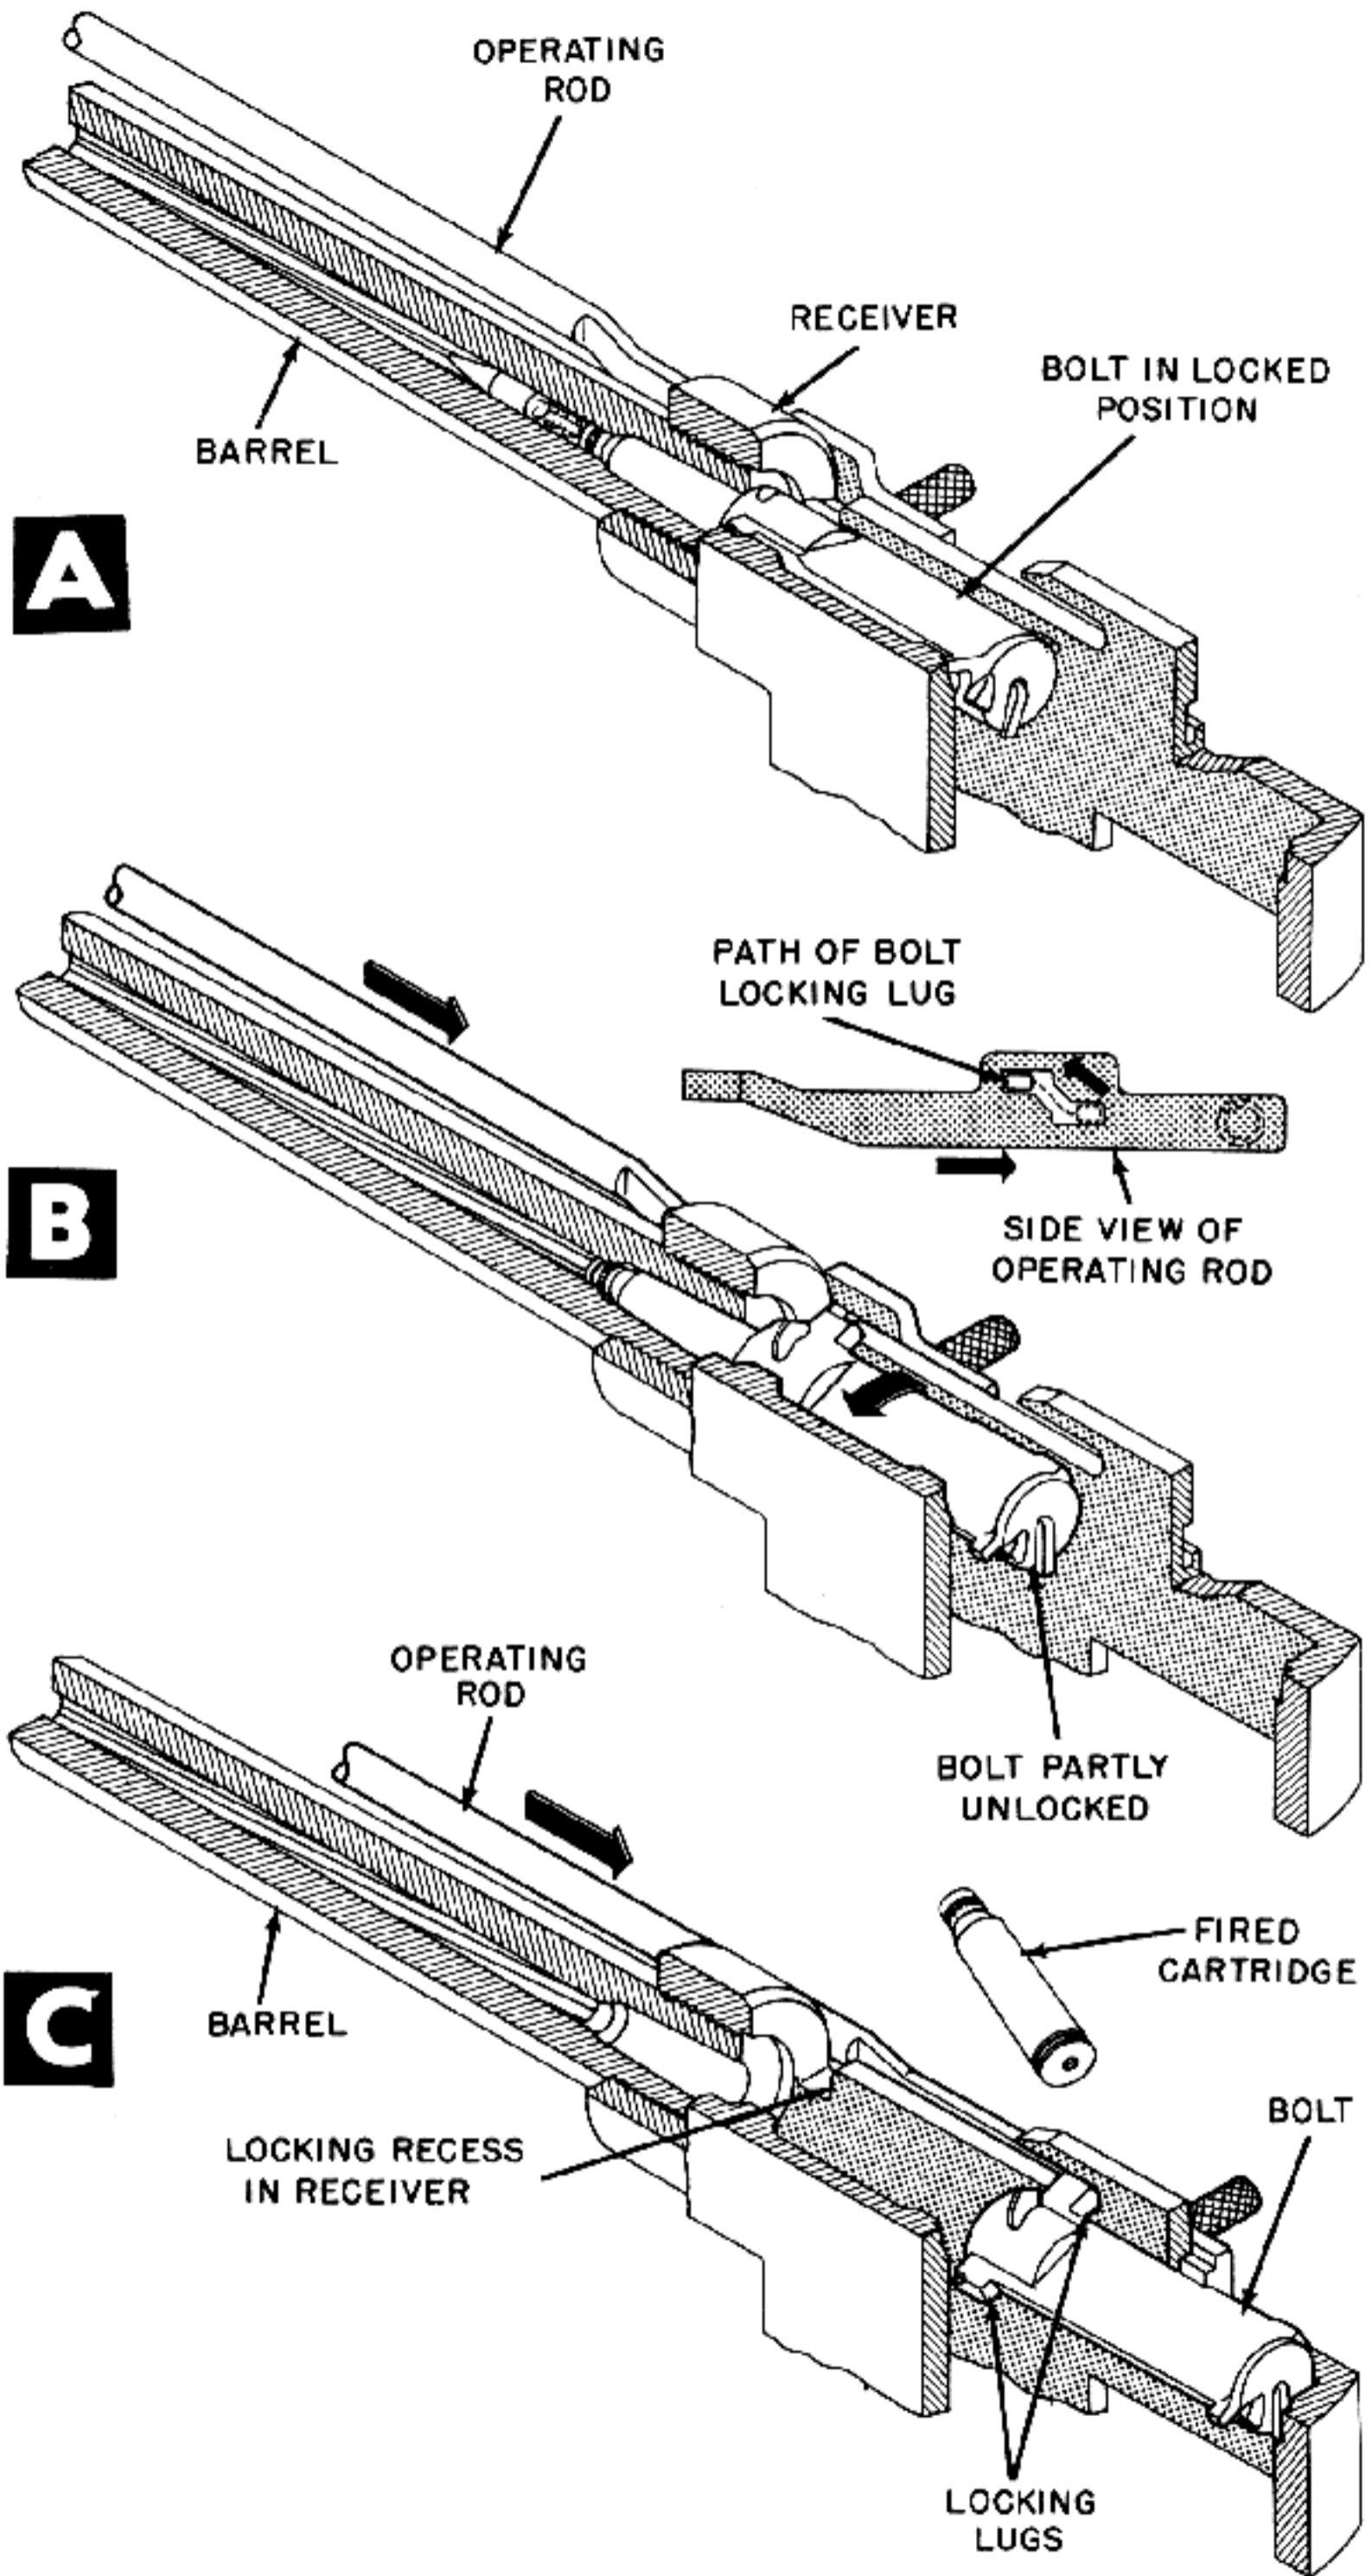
Cam on Operating Rod Unlocks Solid Bolt.
